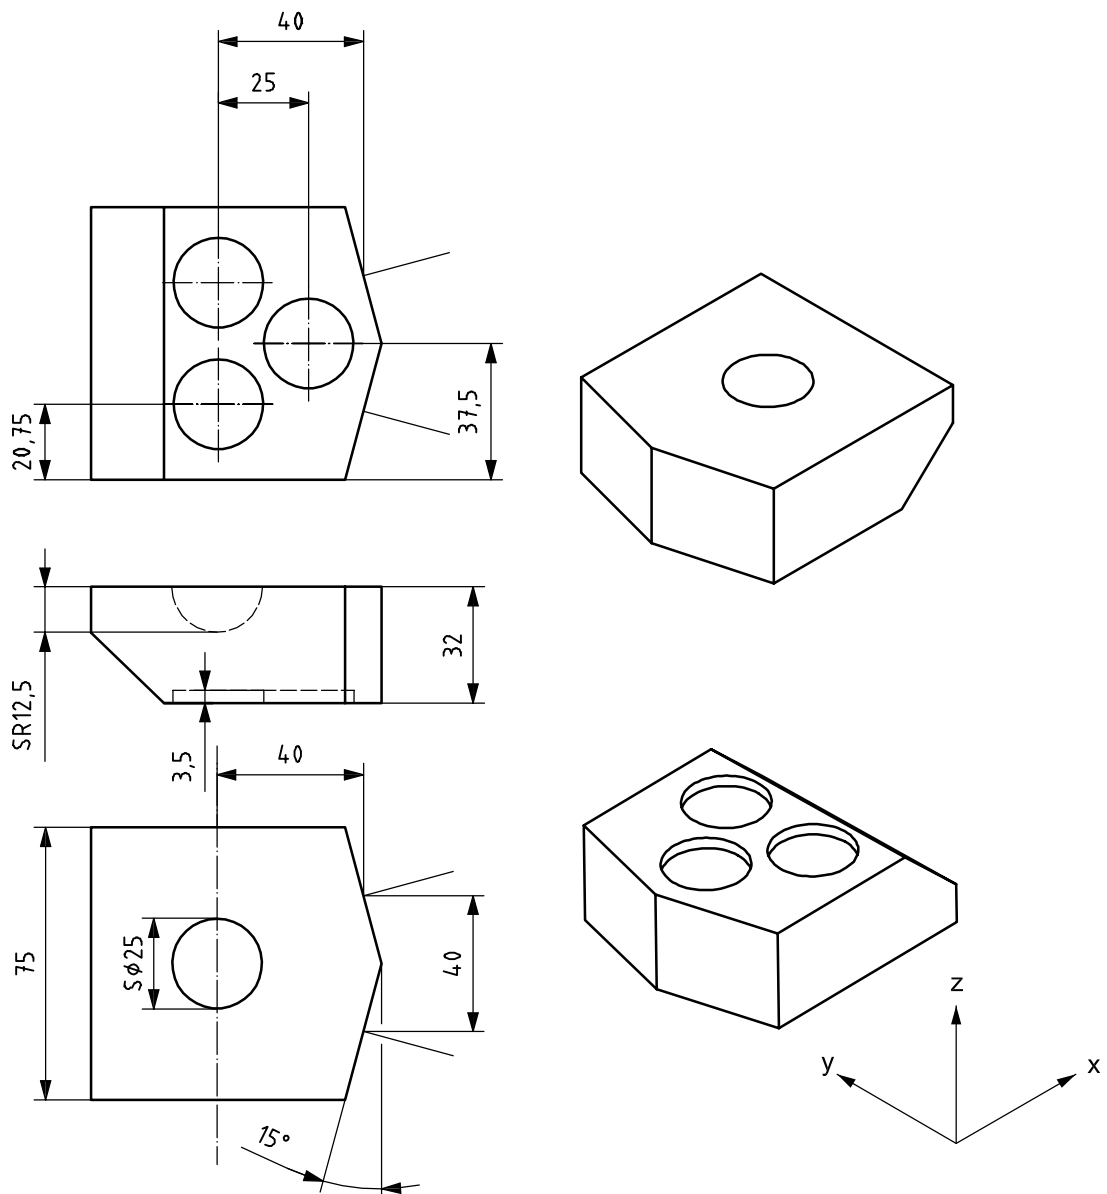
Lumbar bilateral UHMWPE test block for screws or bolts
